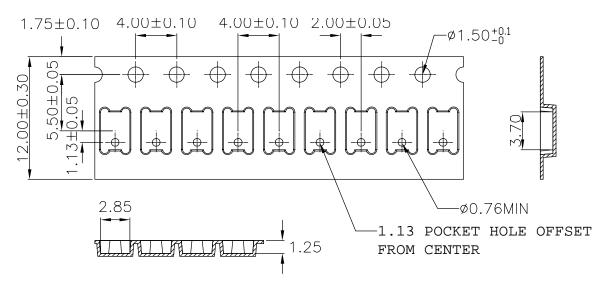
Tape for 4.72 × 3.76 × 3.50 mm Package (all dimensions in mm)
